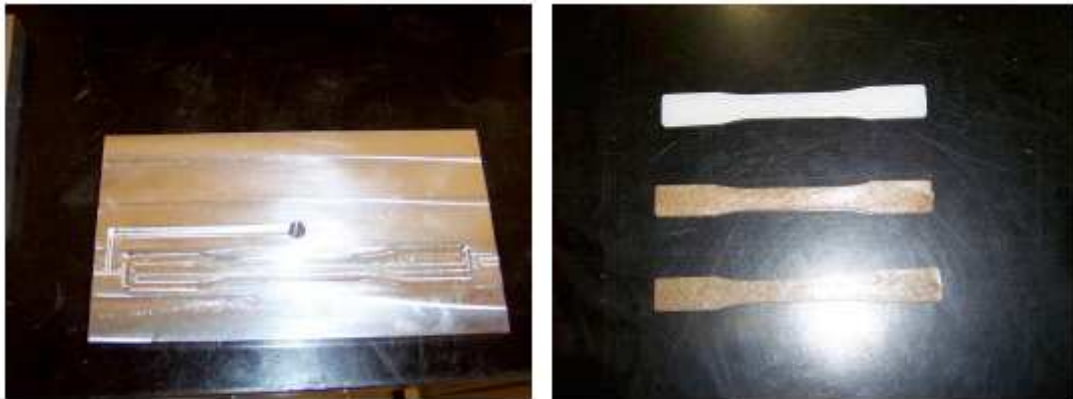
Tensile test specimen injection mold and specimens after injection molding.
